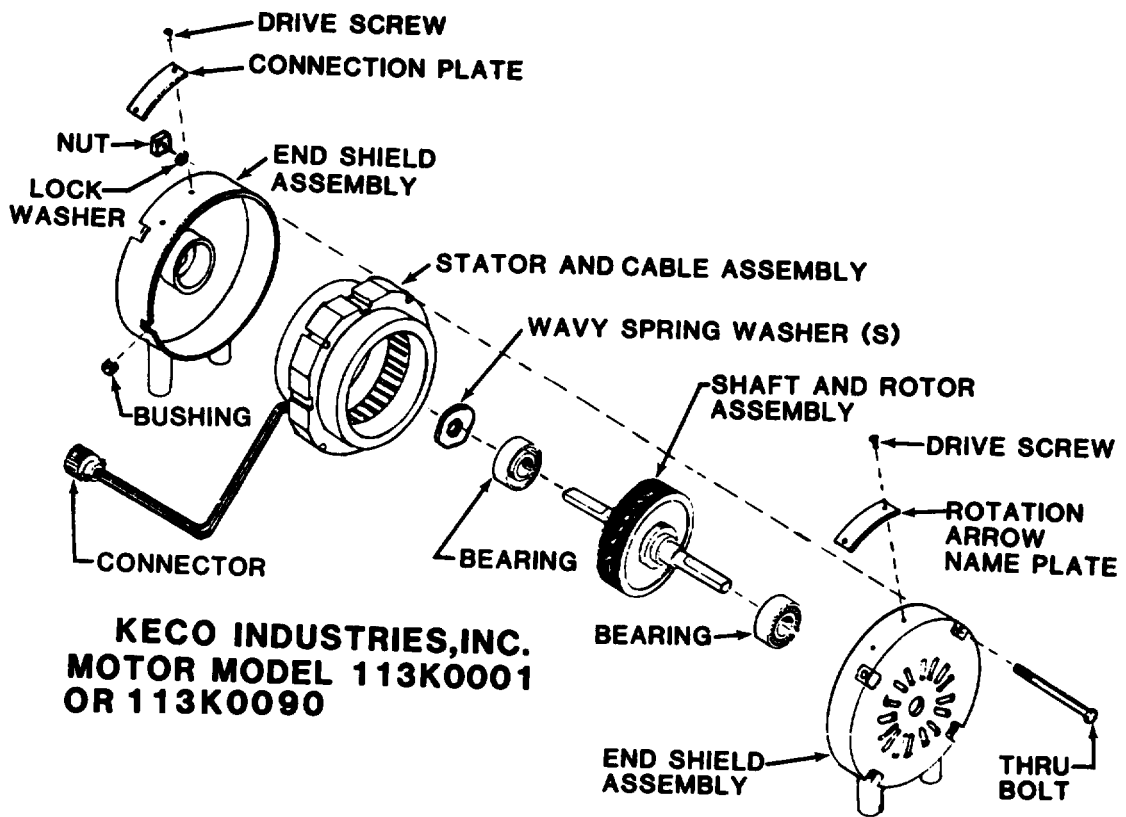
Motor Assembly, Keco Industries, Inc., Model 113K0001 or 113K0090
